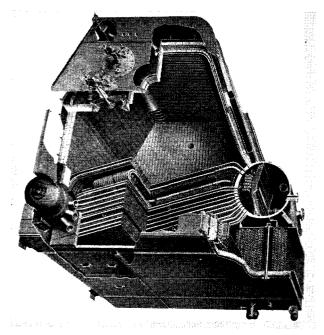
Combustion Engineering Single Furance Destroyer Escort "D" Type Boiler.
